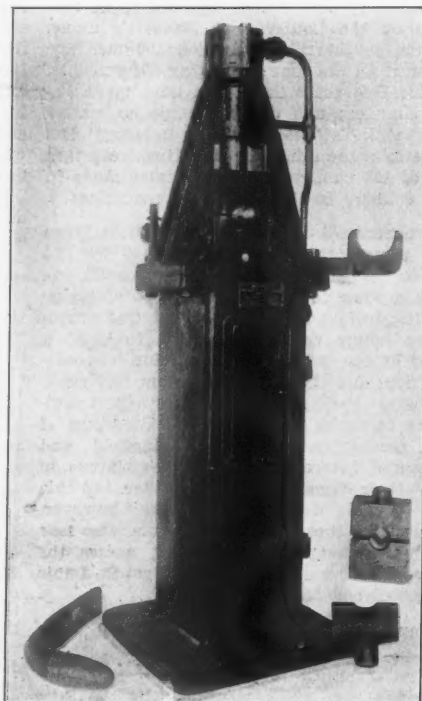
McGrath Single-Cylinder Flue-Welder.
